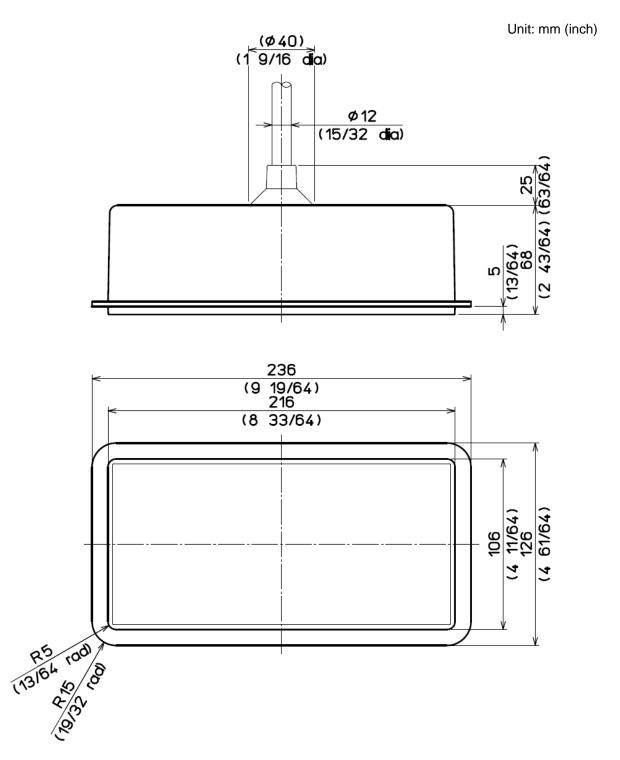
Outline dimensions of a transducer (TD361-K)
